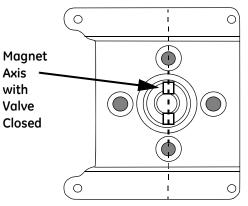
Magnet Orientation for Rotary Valves with Valve Closed
